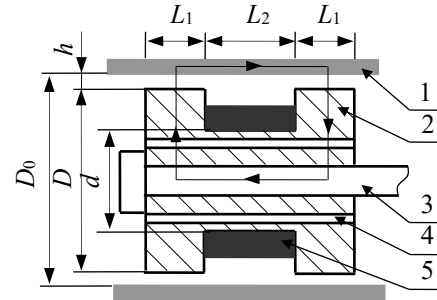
Configuration of the magnetic circuit of MR damper (1-Cylinder; 2-Piston; 3-Rod; 4-Damping hole; 5-Coil)
